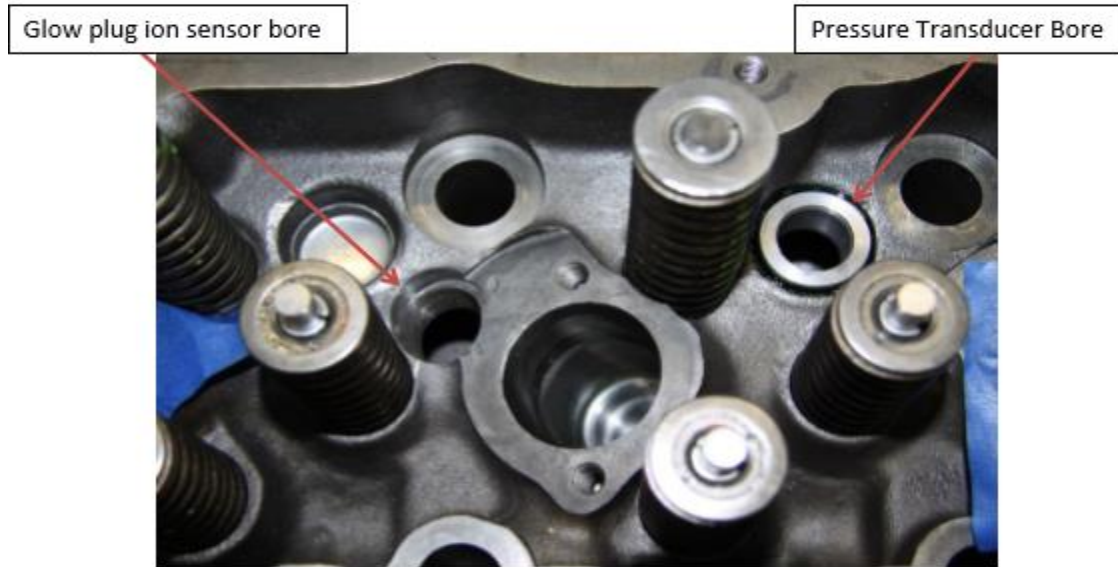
4 Top view of selected sensor location in engine cylinder head
